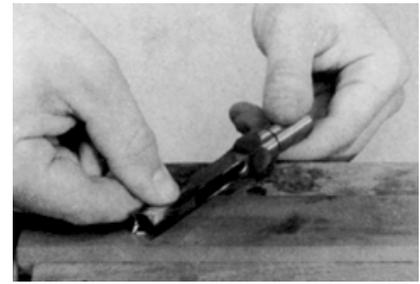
Lay the chisel on a flat stone and move it back and forth to remove the grinding burr.
